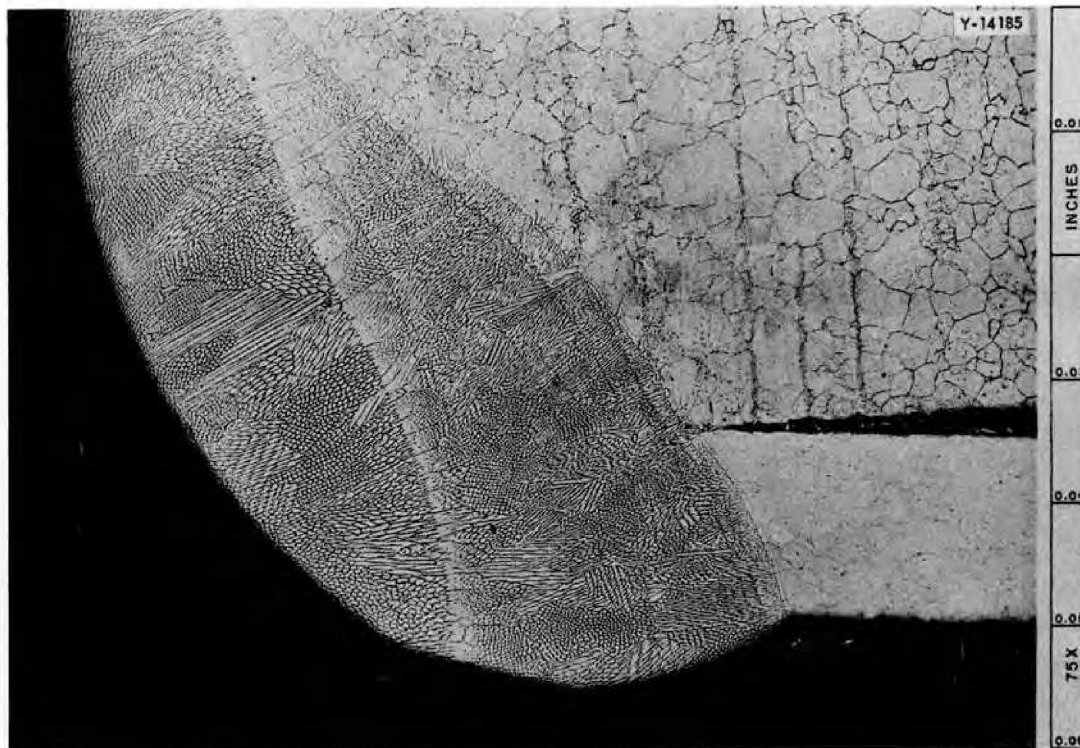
Tube-to-Header Weld Produced with the Semiautomatic Welding Equipment. Etch: electrolytic; oxalic acid. 75X. Reduced 13%.
